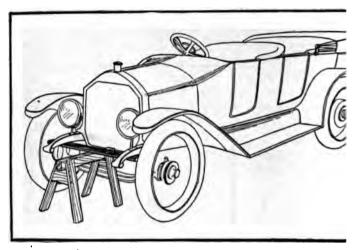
Outlining Method of Supporting Front End of M Frame When It is Desired to Remove Either Front Springs Axle.
